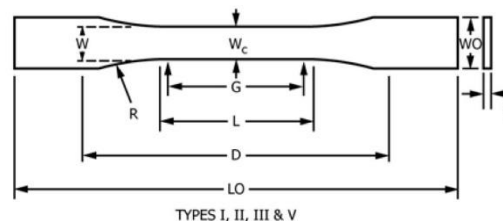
Drawing of tensile sample with dimensions of the specimen according to ASTM D638 [24]. Specimen dimensions for Type I are $W = 13$, $L = 57$, $W_O = 19$, $LO = 165$, $G = 50$, $D = 115$, $R = 76$, $T = 7$ (dimension in mm).
